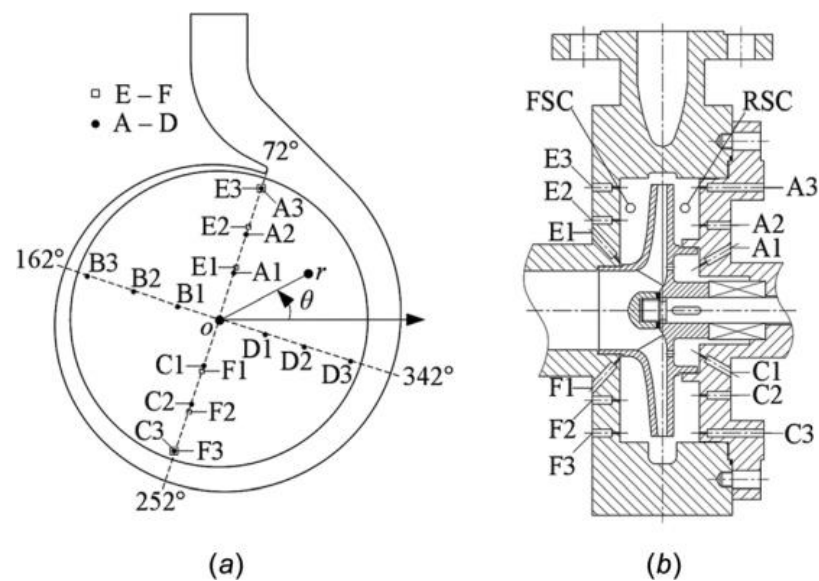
Pressure measuring points: (a) front view and (b) sectional view (FSC stands for front shroud chamber; RSC stands for rear shroud chamber [51]).
